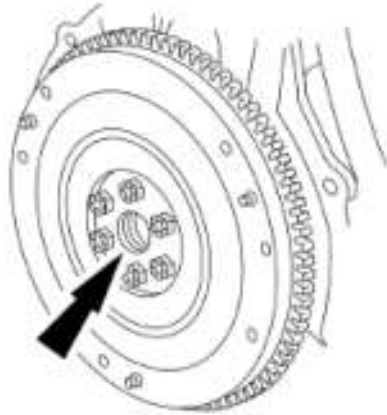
Identifying Flexplate Bolts Tightening Sequence
